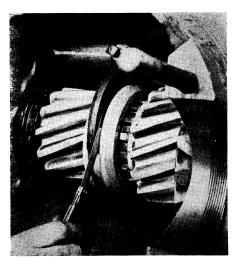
Checking clearance of shift fork machined pads in shift collar with feeler gauge
